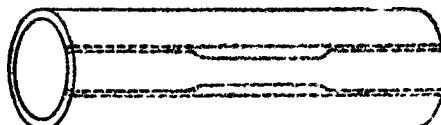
Location from Which Longitudinal Tension Test Specimens Are To Be Cut from Large Diameter Tubing
